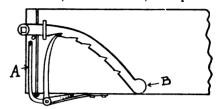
SIDE VIEW OF END GATE FASTENER.
